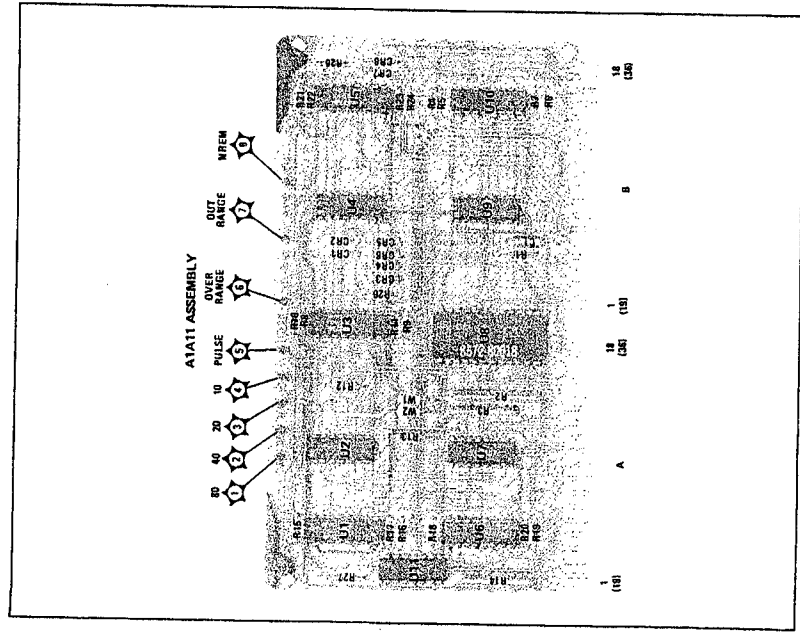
A. A1A11 Digital Processor Assembly Component, Adjustment and Test Point Locations
